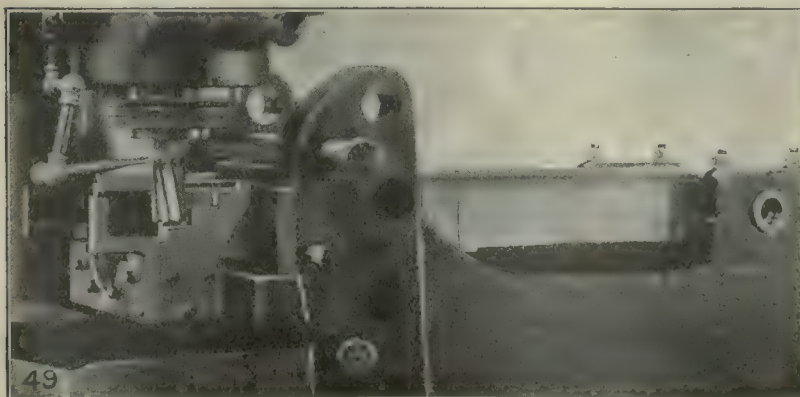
MILLING FIXTURE FOR END, SHOWING GAGES USED FOR SETTING CUTTERS
